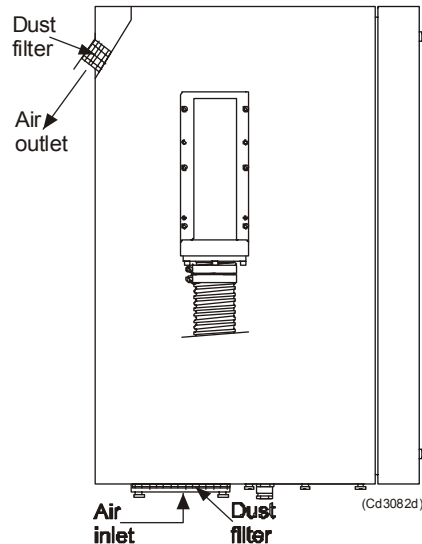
Side view of Transceiver Unit indicating air inlet/outlet and filters
